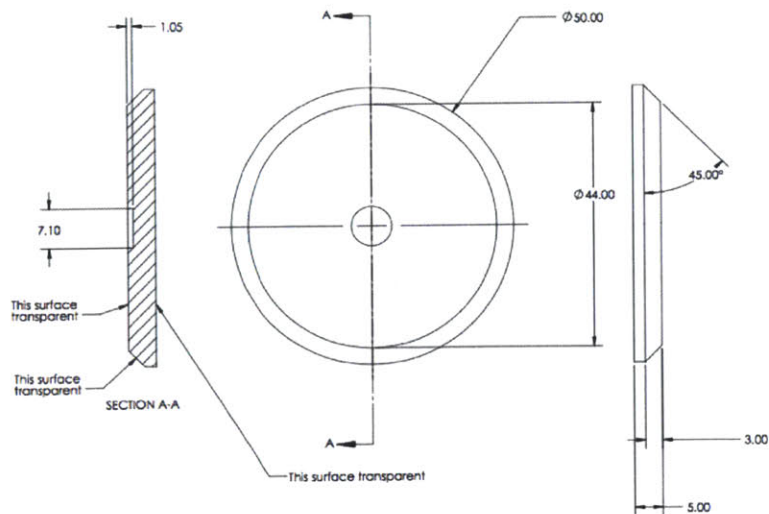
Engineering drawing of the acrylic beveled upper plate geometry. All dimensions are in millimeters.
